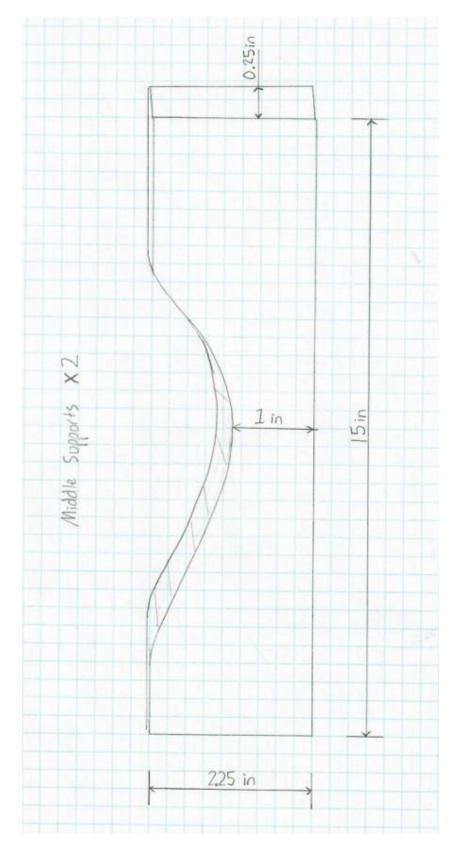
The sketch and dimensions of the middle supports of the ramp.
